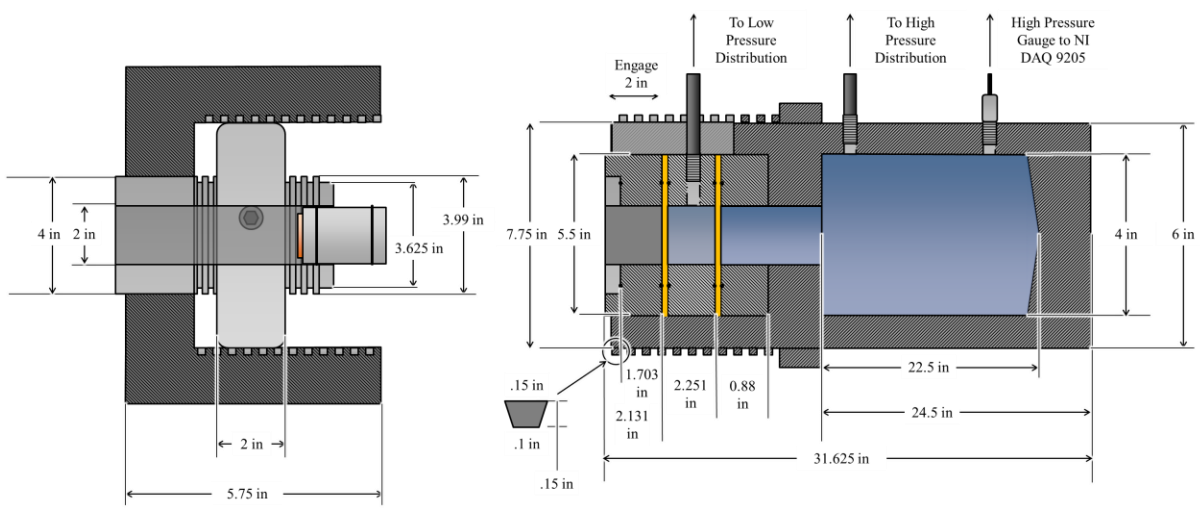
Breach assembly and dimensions (taken by caliper).
